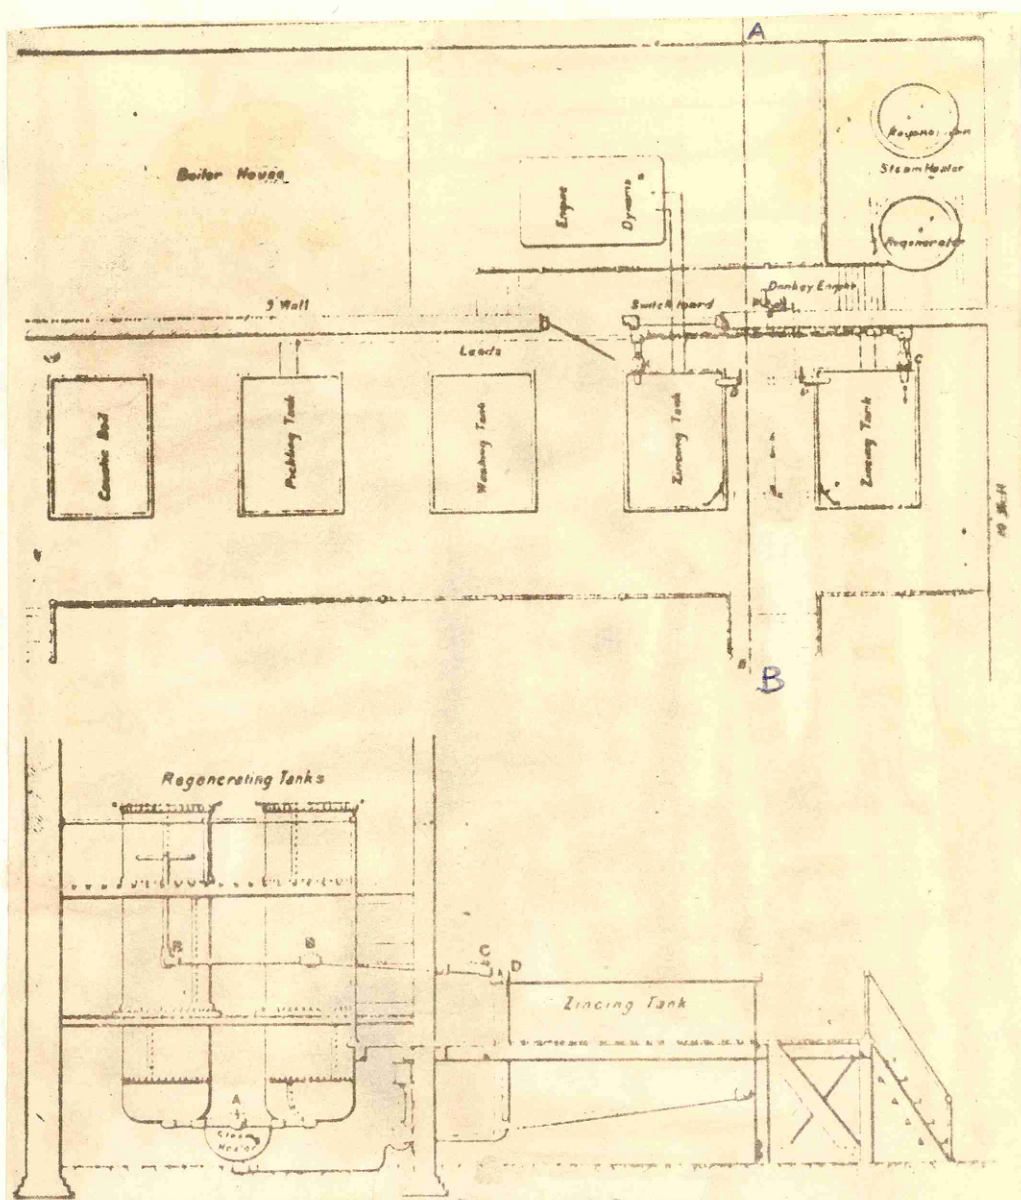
(c) PLAN AND SECTIONAL ELEVATION OF
